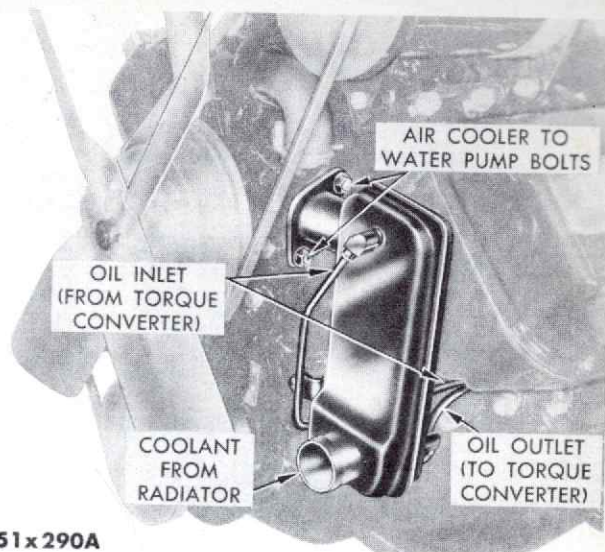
Torque Converter Oil Cooler (Pump-Fed Models)
